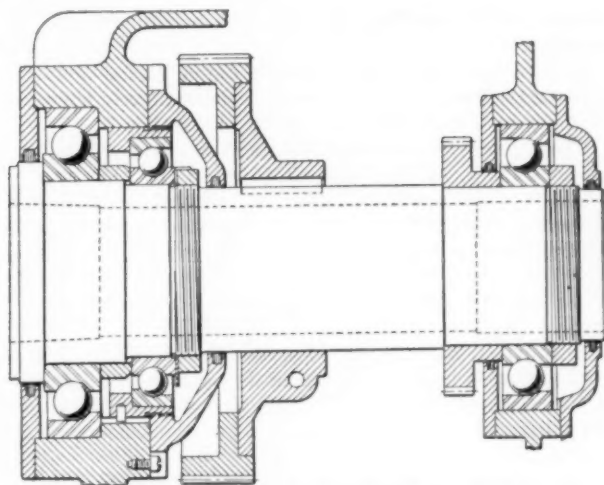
THREE-BEARING FULLY ADJUSTABLE MOUNTING ON LARGE SLOW-SPEED AUTOMATIC SPINDLE
